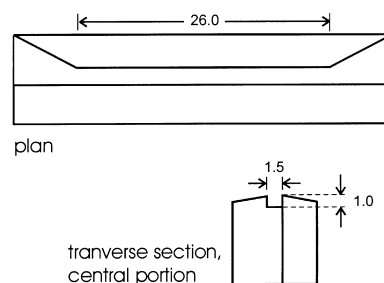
Principle details of knife-edge split mould used for fabricating test specimens.
